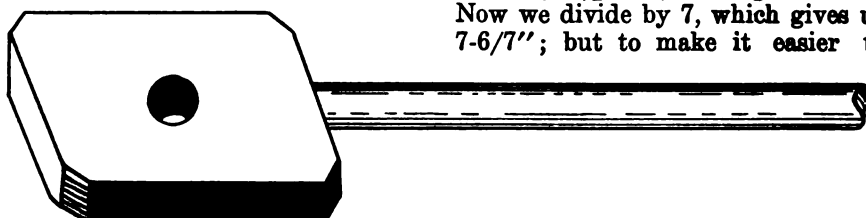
THE HEADING TOOL USED IN FORGING THE ROD AND CLAMP
